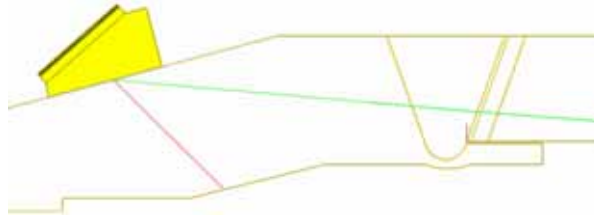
Inspection geometry with weld and buttering layer connecting carbon steel and stainless steel parts. A vertical, rectangular flaw shown with red colour in the weld root area.
